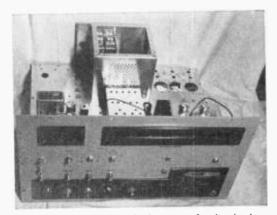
Beginning to look like a completed unit, the front panel is mounted and switches installed. Meter and dial installed, along with final amp shield.
